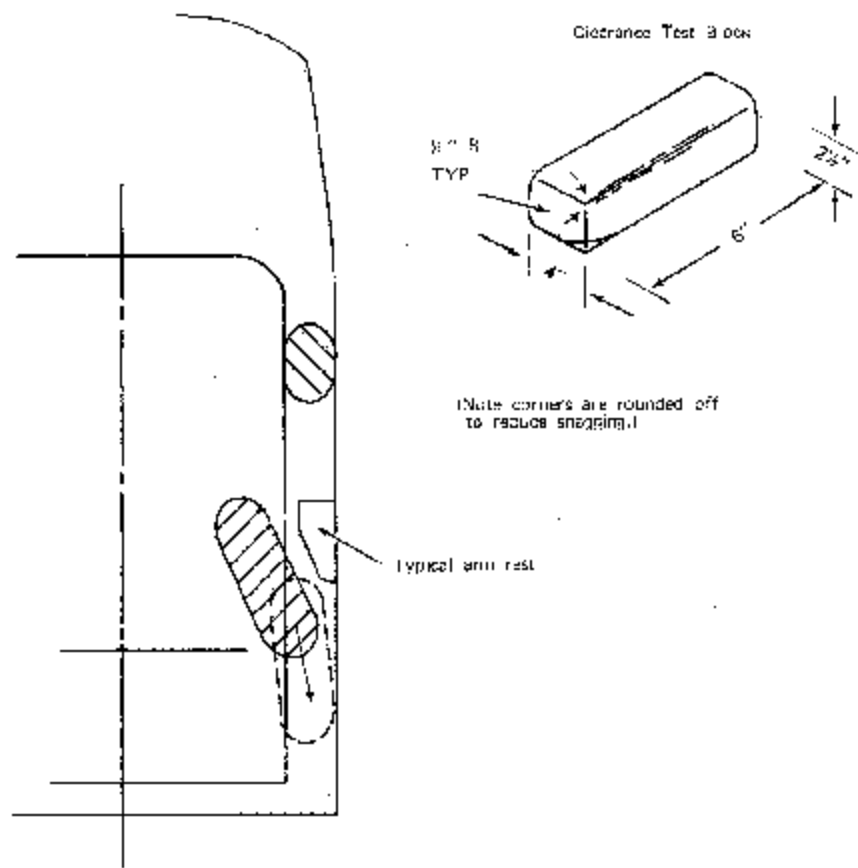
USE OF CLEARANCE TEST BLOCK TO DETERMINE HAND/ARM ACCESS
